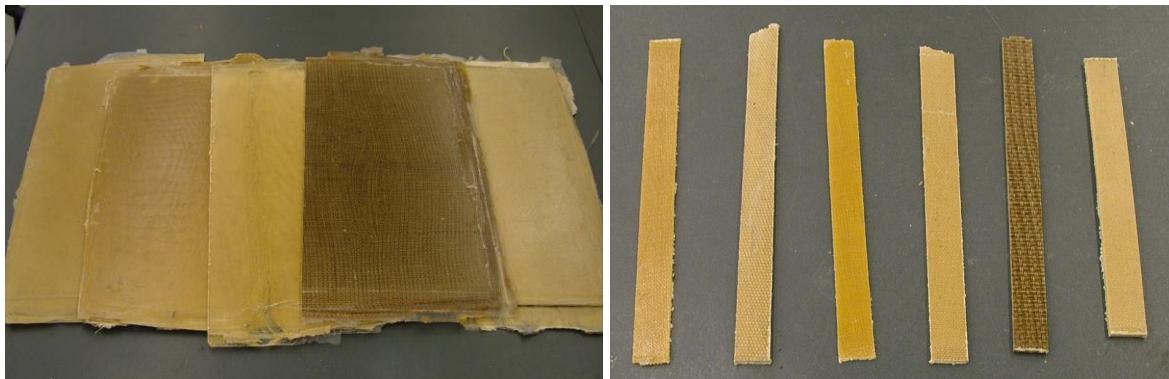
PLA/natural fibre composites made with compression moulding (left) and the test specimens (right)
